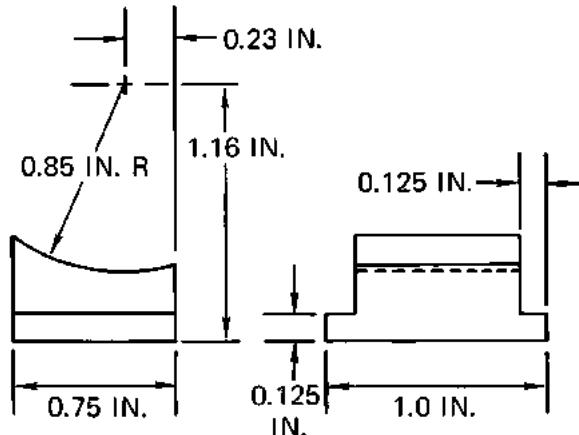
Angle Beam Wedge Requiring a Coupling Fixture
